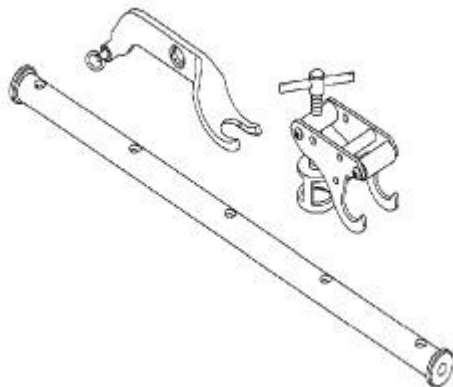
COMPRESSOR, VALVE SPRING - 9065A
